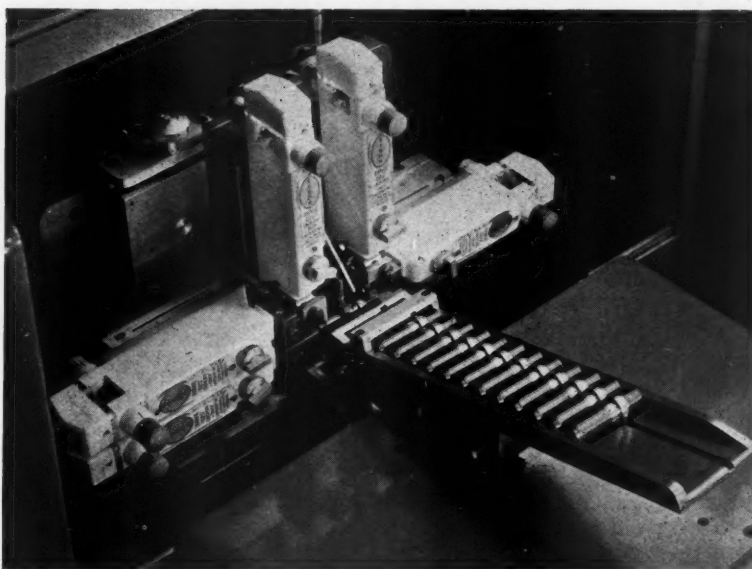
Magazine feed to Sigma multi-dimensional inspection machine
